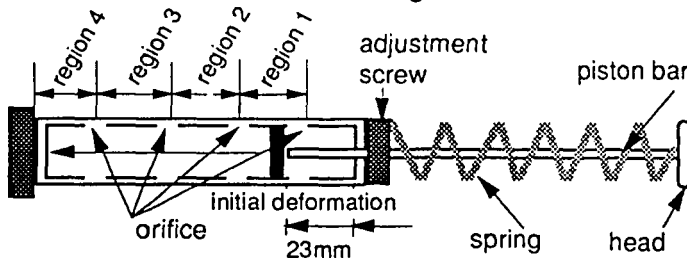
Assembly of Spring and Damper in Cylindrical Joint.
